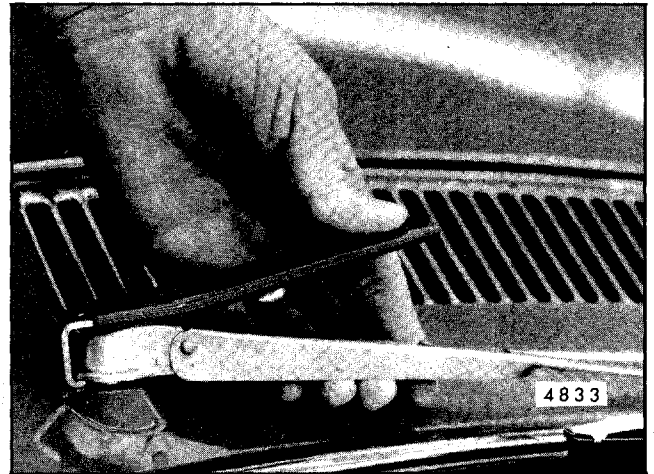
Wiper Arm Removal Tool J-8966 (or Equivalent)
